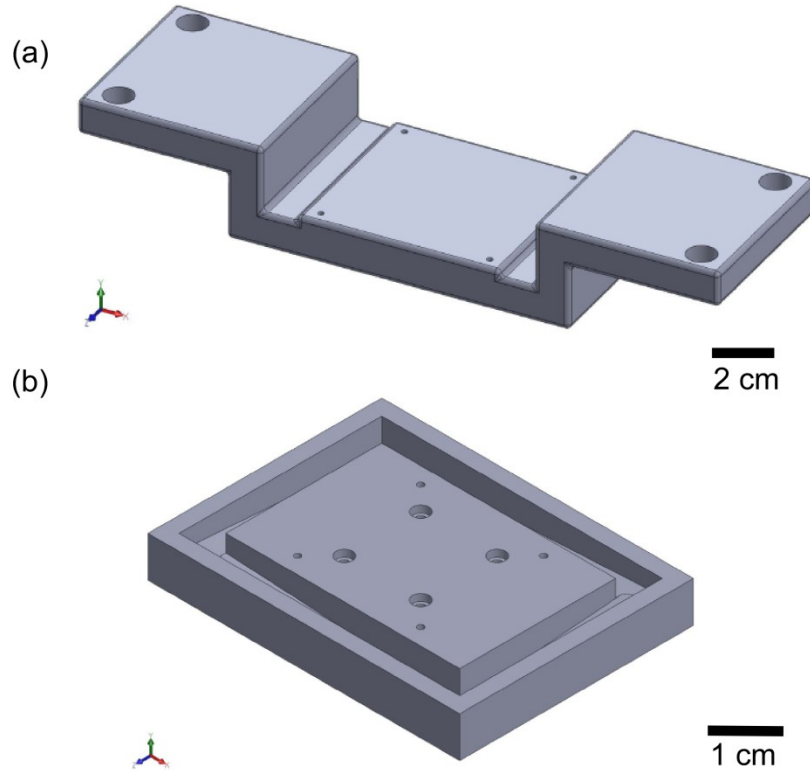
(a) Customized aluminum mounting fixture for integration of motorized stages onto the USM platform (b) Customized aluminum worktable to hold workpiece during μ USM.
